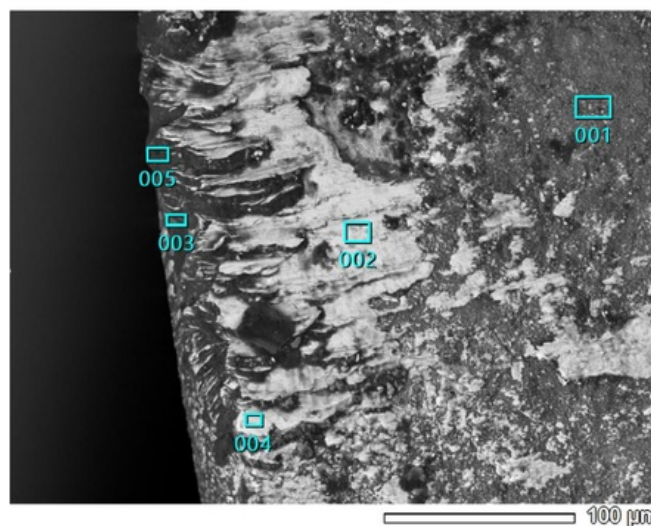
DNMG cutting tool after Average machining 3D printed Ti-64.
